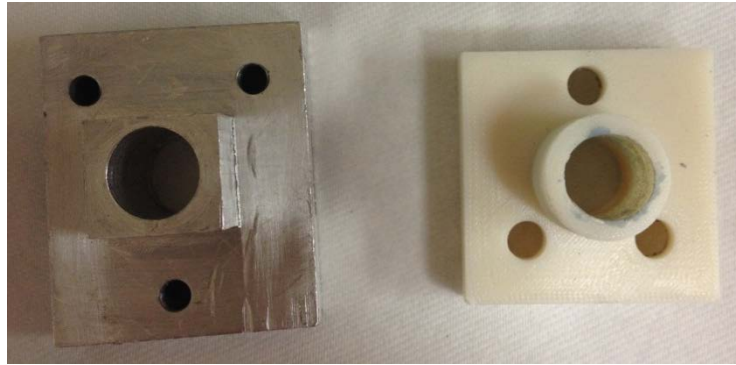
Fabricated aluminum and plastic cement holder using CNC machining and 3D printer
